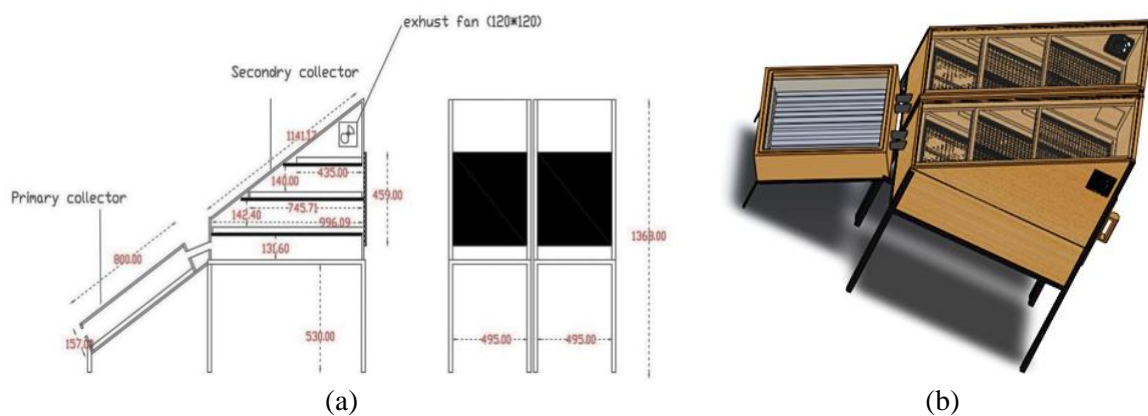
(a) Sectional front view and back view of the mixed-mode solar dryer including all dimension of components in mm and (b) 3D view of the dryer created by using SOLIDWORK software for depicting each component of dryer
